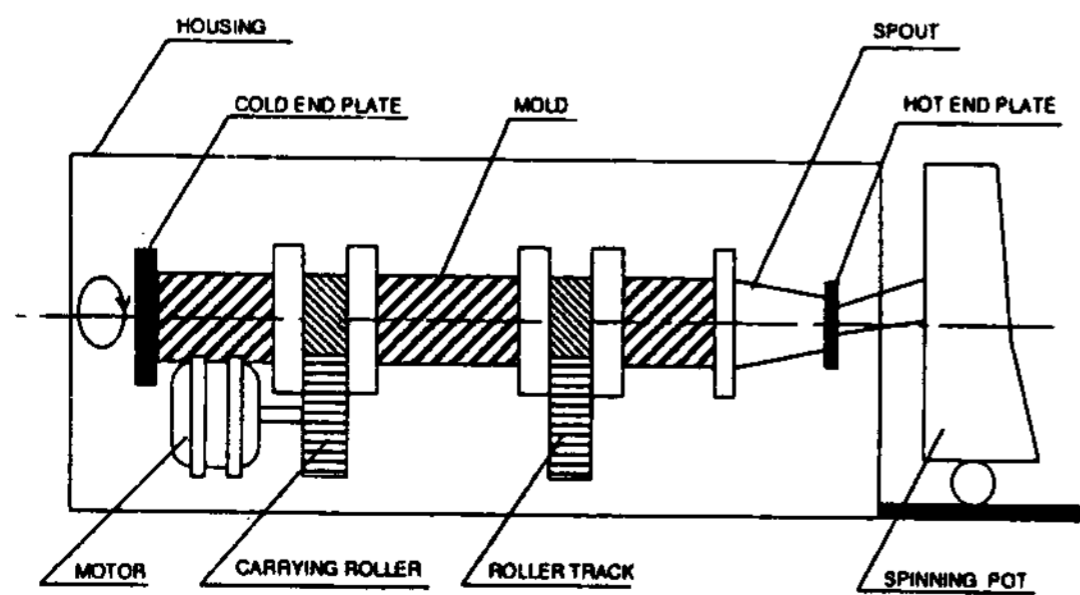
Schematic diagram of a horizontal centrifugal casting machine.
